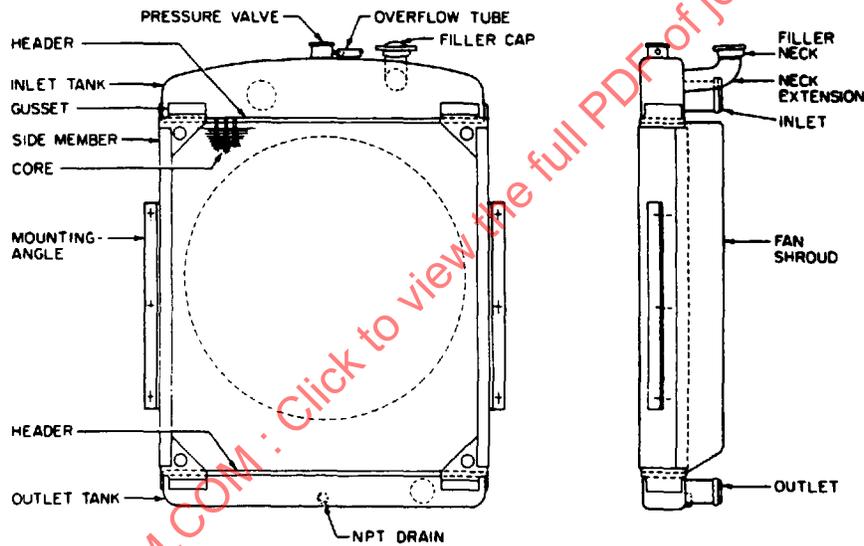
HEAVY-DUTY RADIATOR, SHEET METAL TYPE
